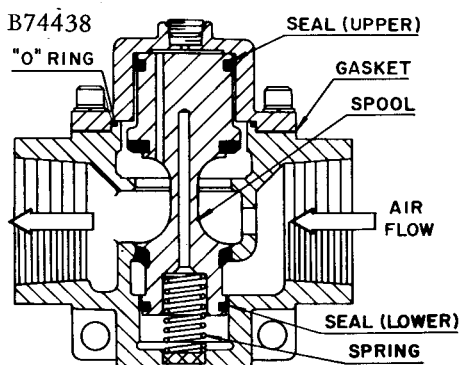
MINIMUM DISCHARGE PRESSURE VALVE
